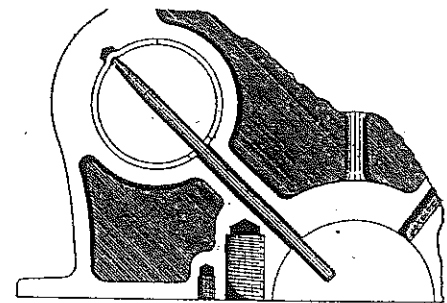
Method of locking camshaft bearings with round-nosed punch on 228, 236, 248, 256 and 270 engines
